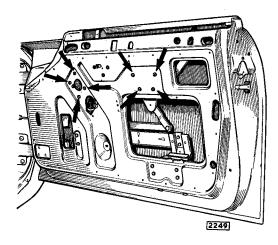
The screws securing the front window winding mechanism to the door frame.
